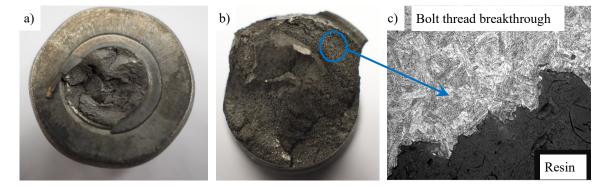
Assessment of breakthrough of the bolt after failure, a) bolt head, b) threaded bolt pin, c) cross cut from the threaded bolt pin
